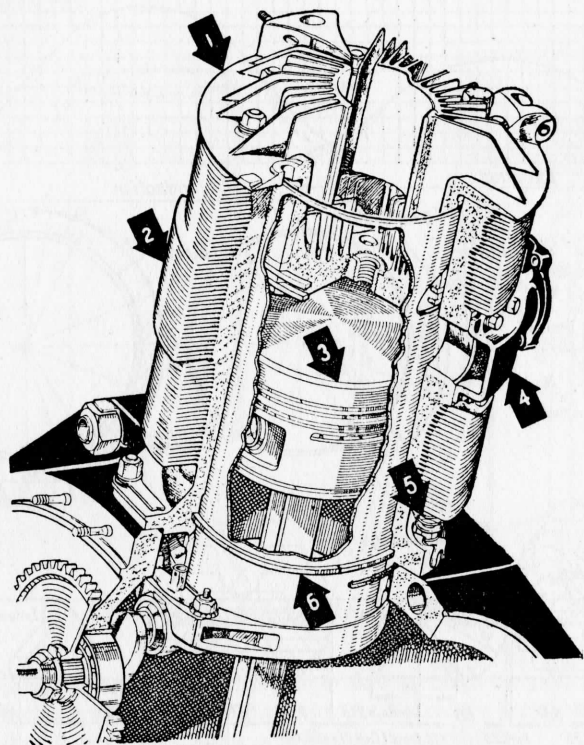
The original head and cylinder of the Bristol sleeve valve engine.
